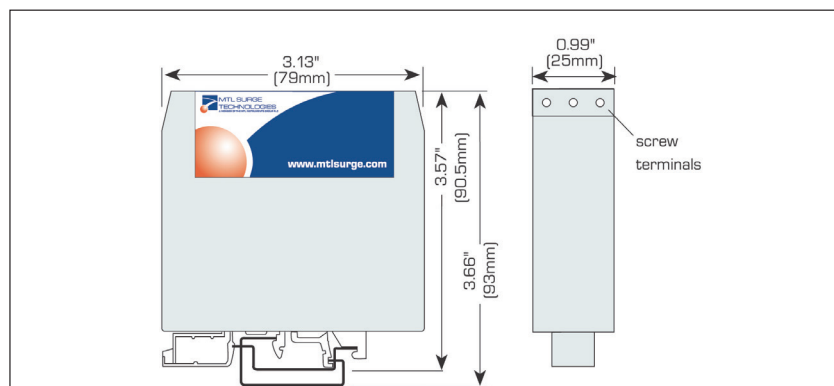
Dimensions and mounting — MA05/D and MA10/D
